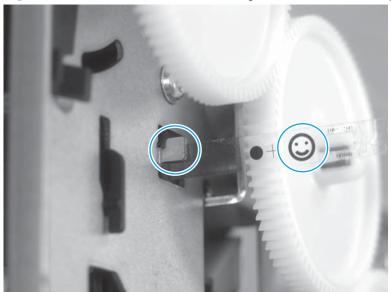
Remove the sensor carriage PCA and encoder strip (6 of 8)
